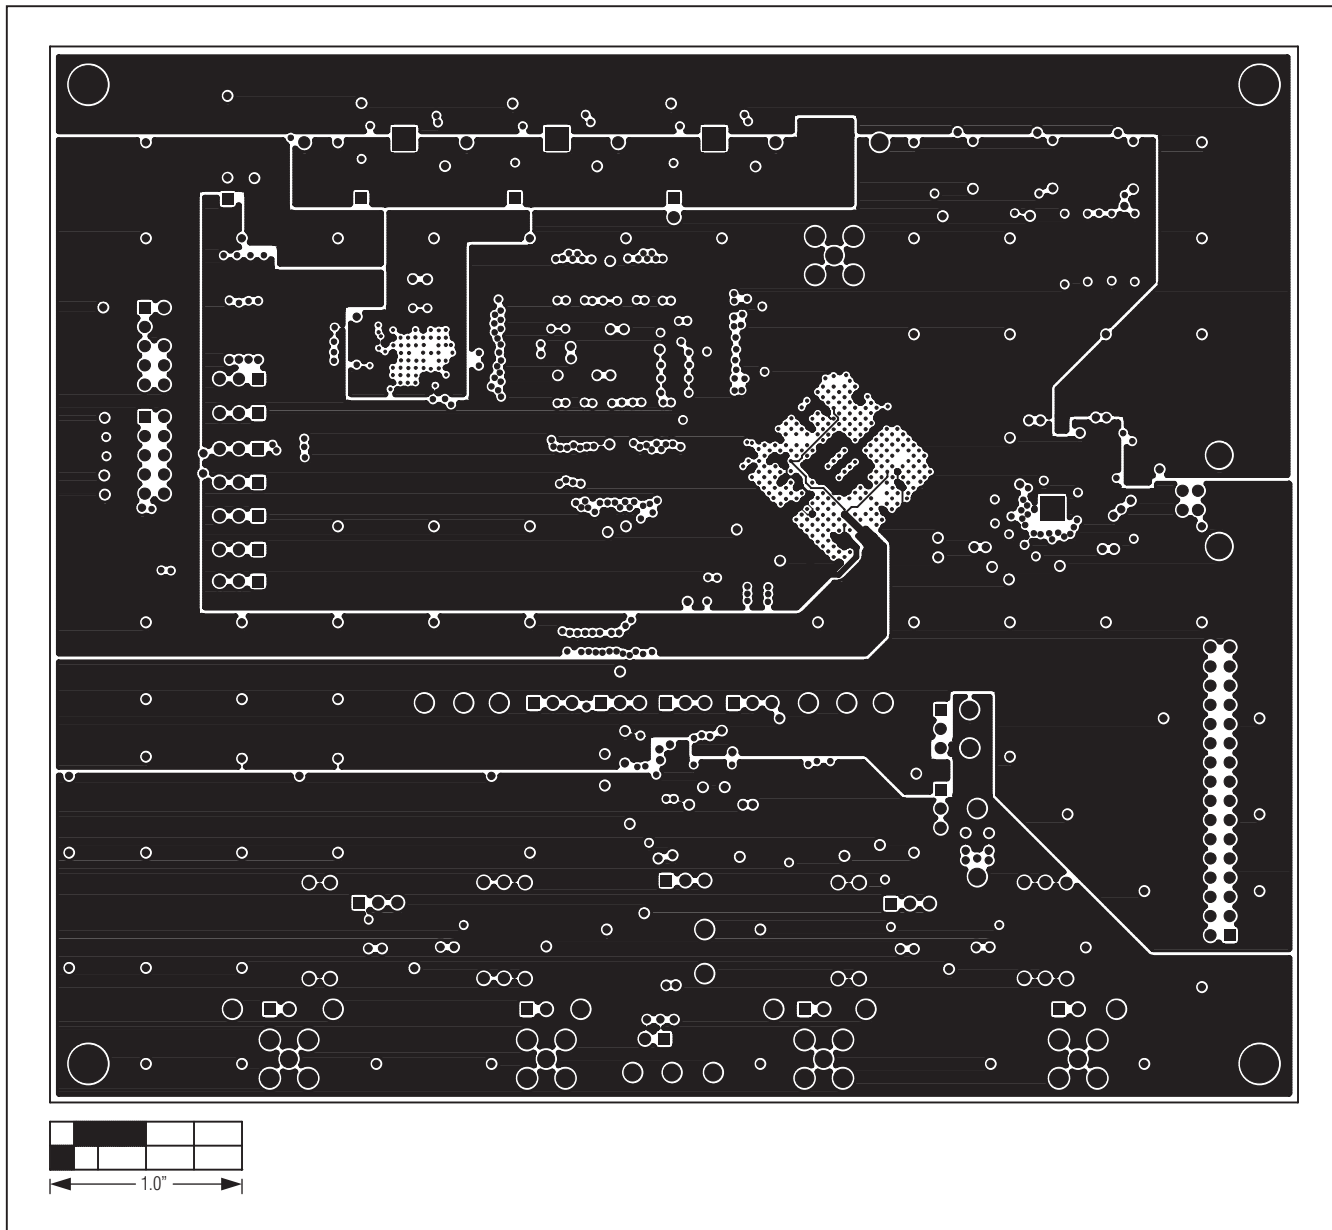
MAX11666 EV Kit PCB Layout—Layer 5
